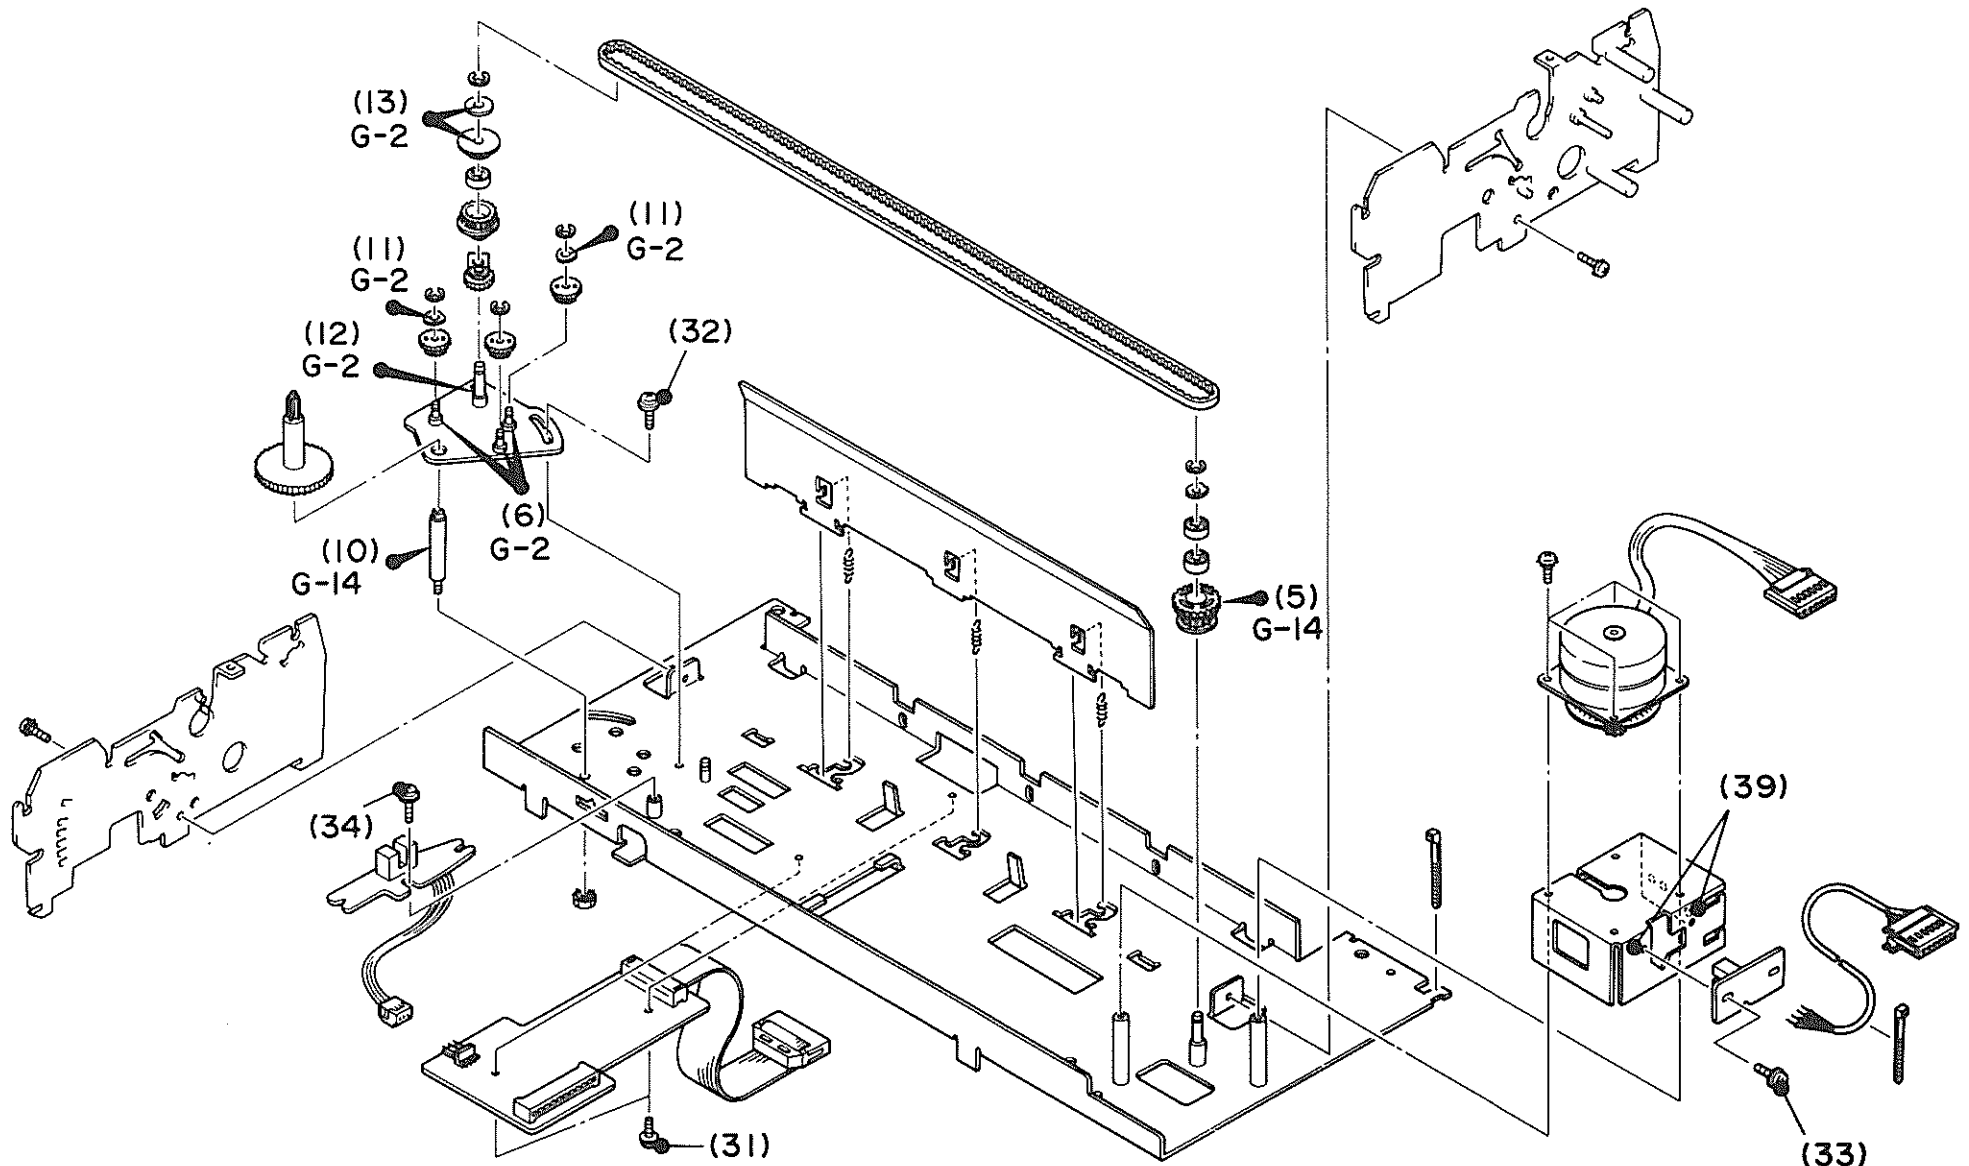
Model-3560 Lubrication and Adhesive Application Points Drawing 4
